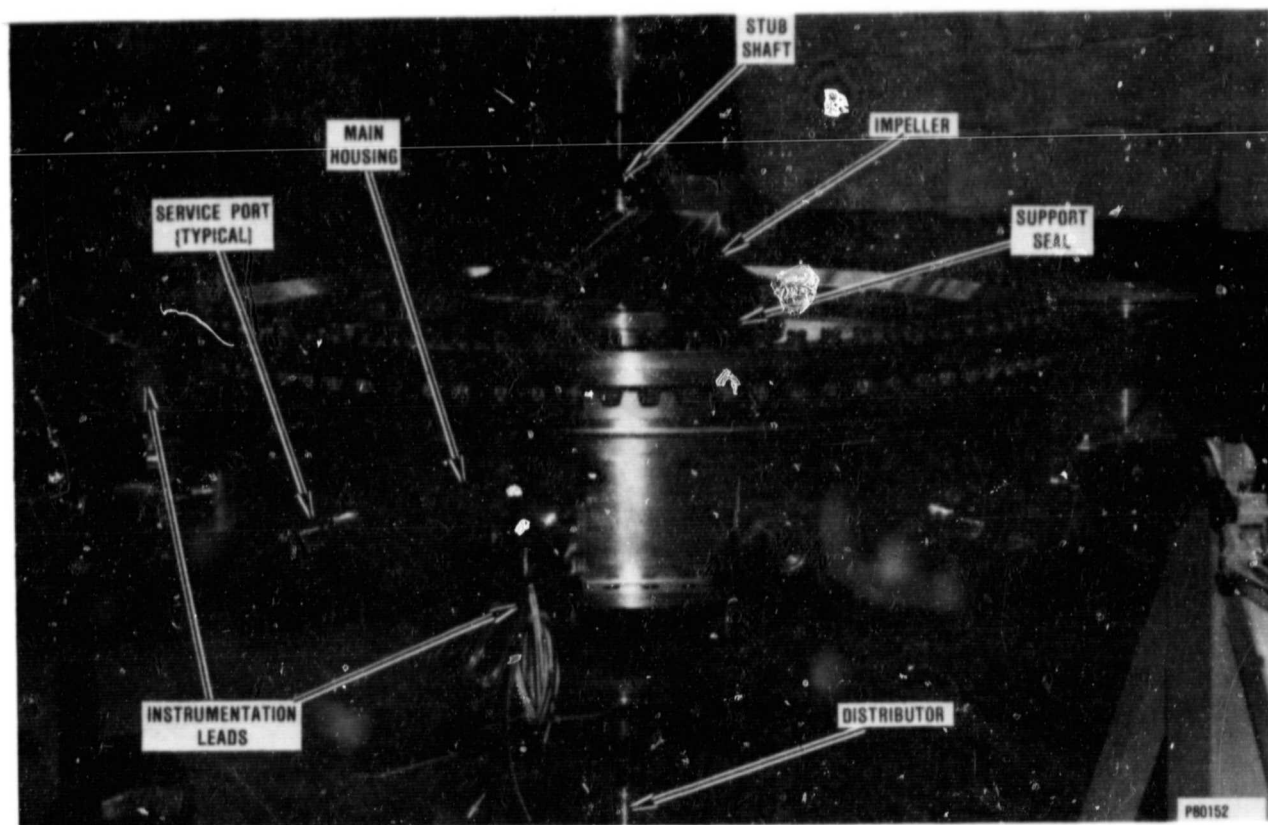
Main Housing, Showing Impeller, Distributor, and Instrumentation Installed.
